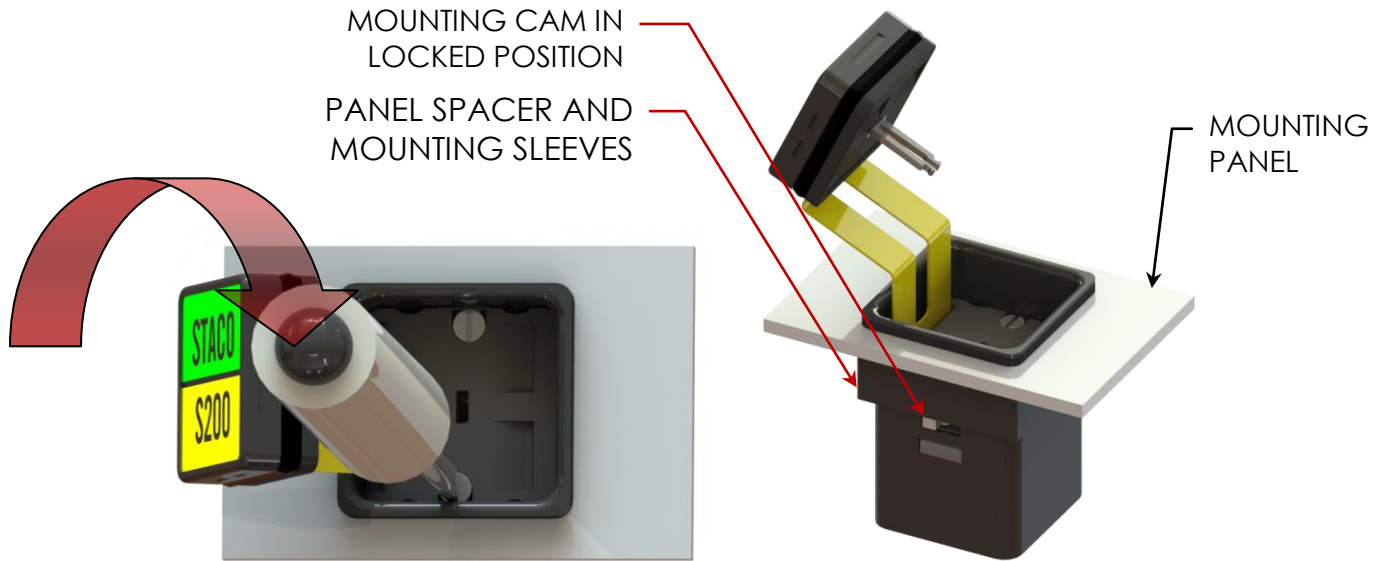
Mounting Cam in Locked Position (flush mount version shown)
